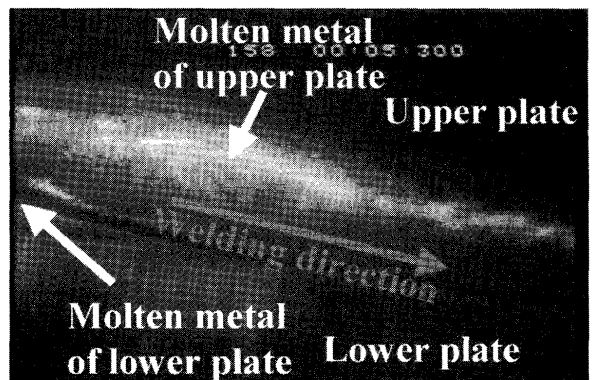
High speed photograph during lap-fillet welding at a welding speed of 3.0m/min
